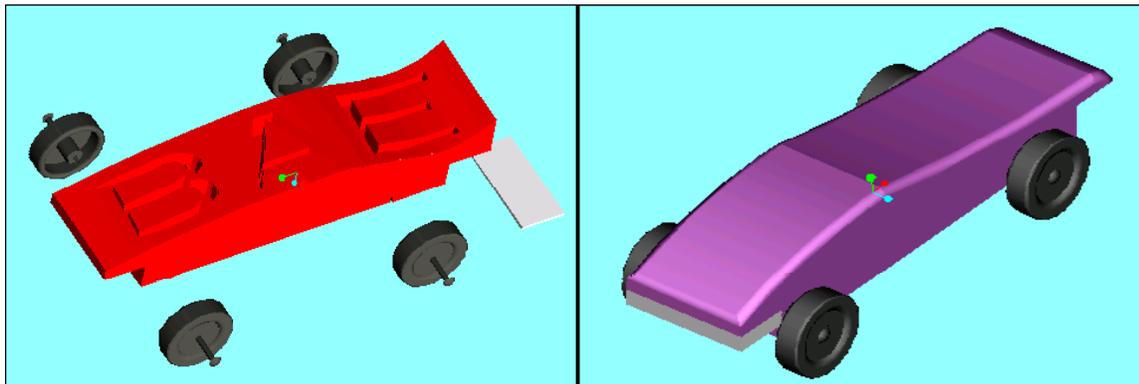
Exploded CAD assembly model. Figure 5. CAD model showing (+,-) setup.
